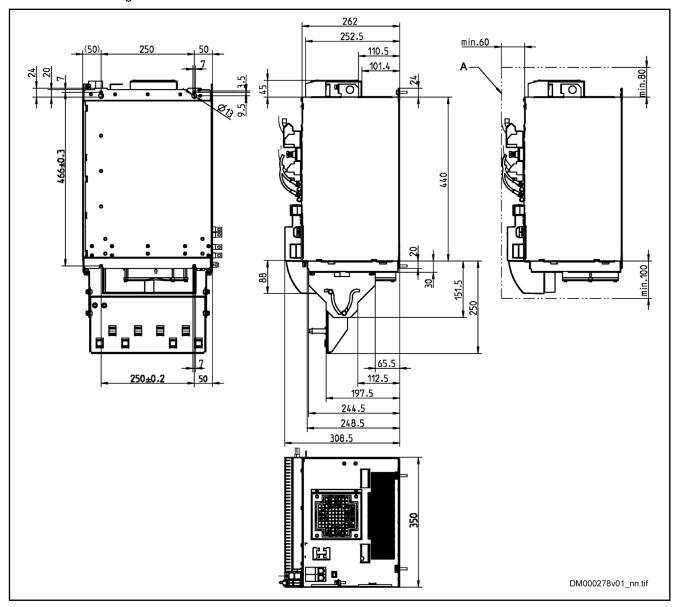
Dimensional drawing HCS03.1E-W0210 with HAS02
